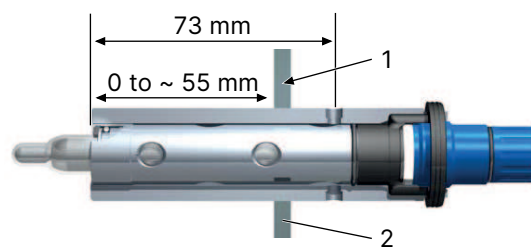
Dimensions [mm] for the installation of the holder onto the
